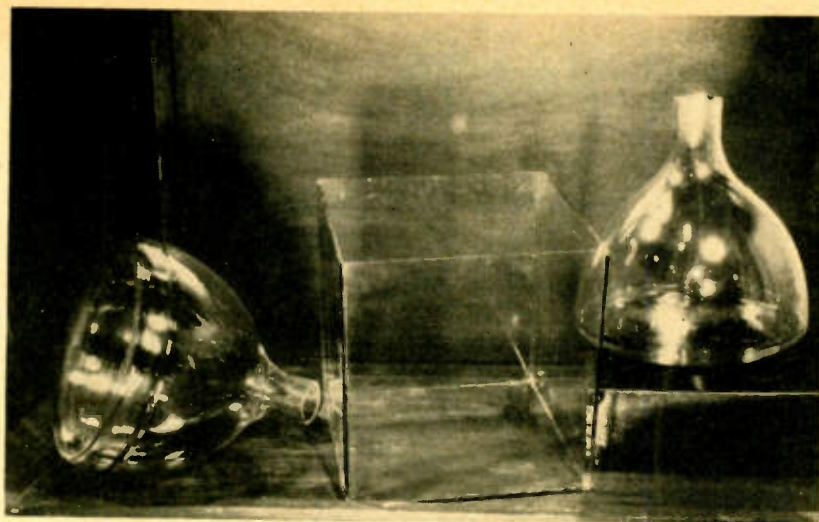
Two examples of large glass products that have been fabricated with HF heating equipment—a large square glass box and two modern type 20-inch face television tubes
